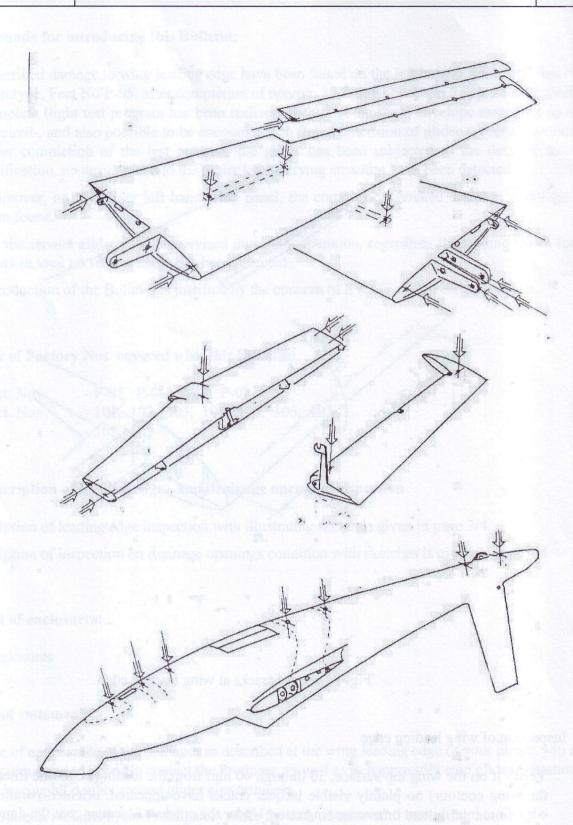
Location of the airframe drainage openings 4÷5 mm
